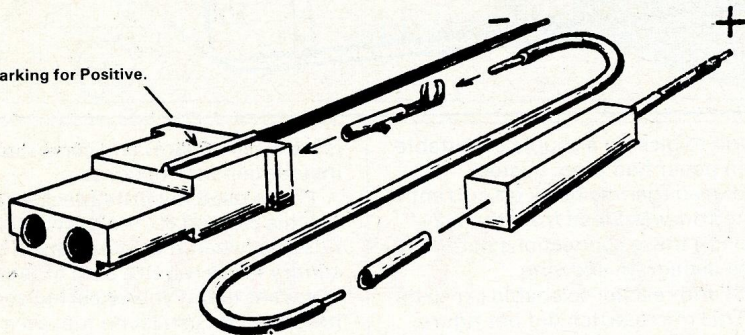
Plug & Socket assembly: Positive is marked & cannot short if fitted thus.
